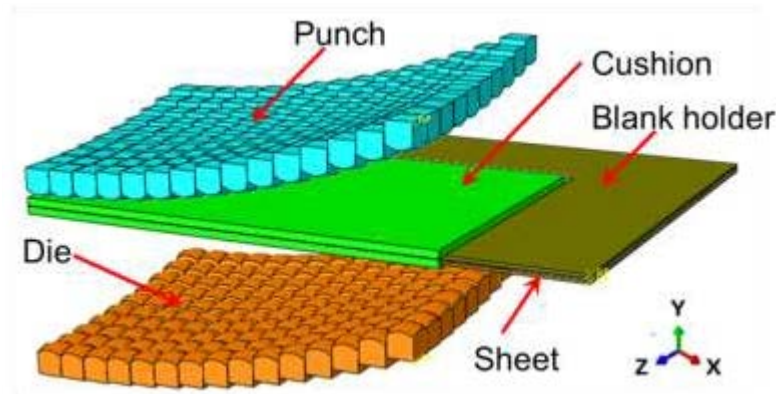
Finite element model of tool with blank holder (Quarter die)
